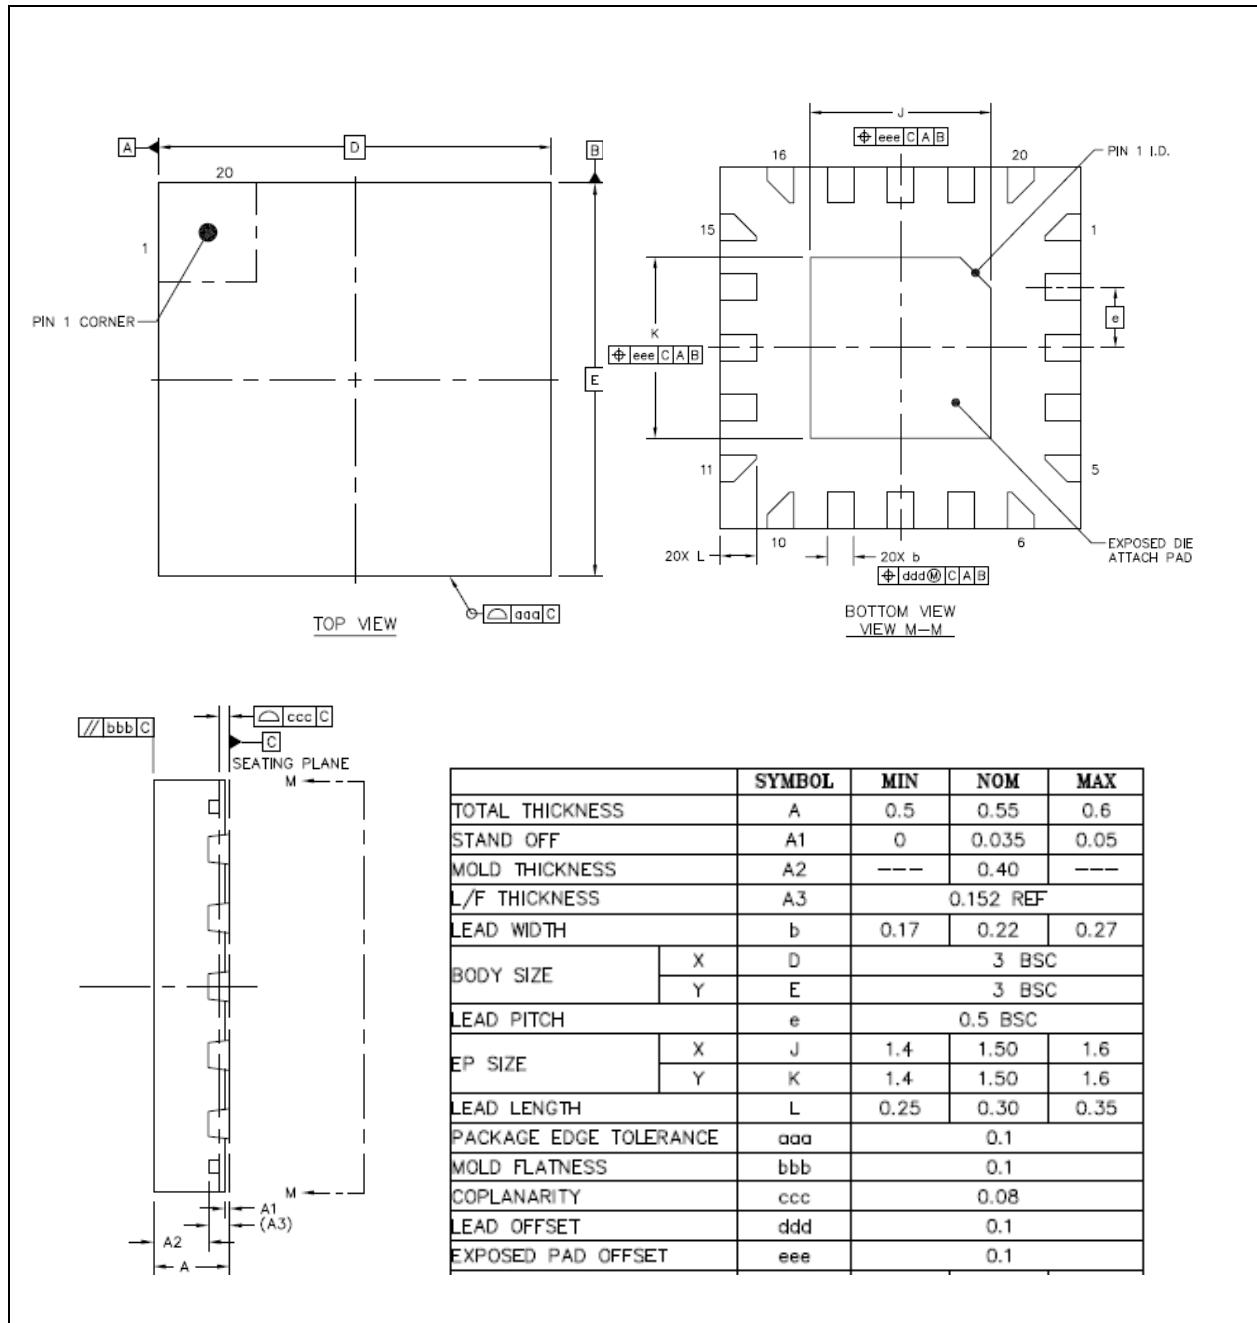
QFN-20 Package Dimension for MS51XB9BE
